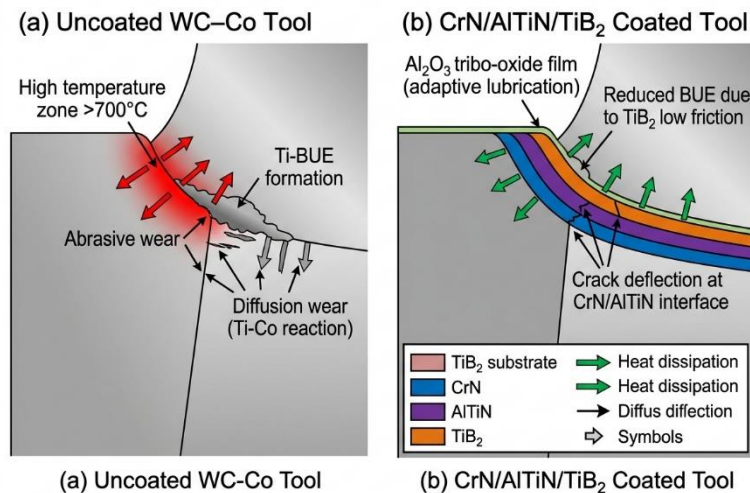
Schematic of dominant wear mechanisms at the tool-chip interface during Ti-6Al-4V milling: (a) uncoated WC-Co tool showing adhesive BUE formation, diffusion wear and abrasion; (b) CrN/AlTiN/TiB₂ coated tool showing adaptive tribo-oxide film formation, TiB₂ anti-adhesion and CrN crack deflection.
